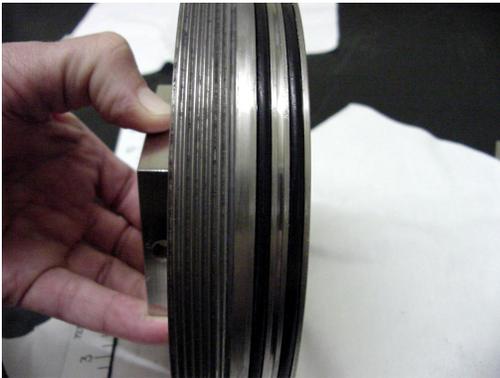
O-Ring Seal from 9975 Shipping Package Primary Containment Vessel (PCV)
